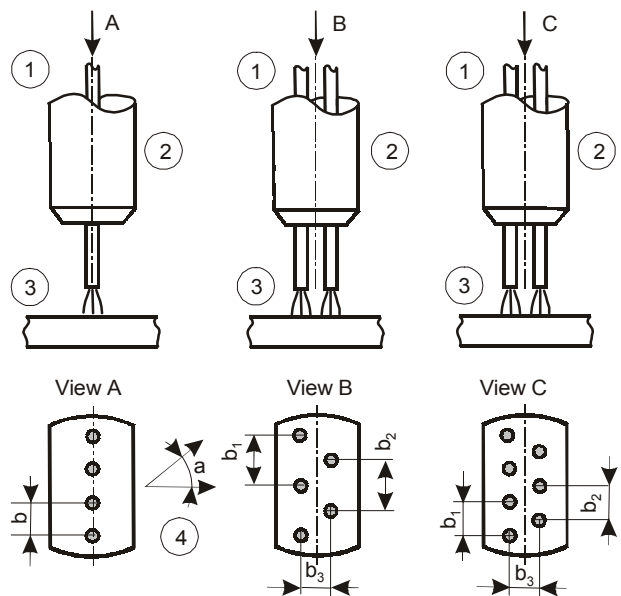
Some of possible arrangements of wires in the contact tube for surfacing: - possible surfacing directions; *b* - distance between wires; 1 - wires; 2 - contact tube; 3 - arcs
